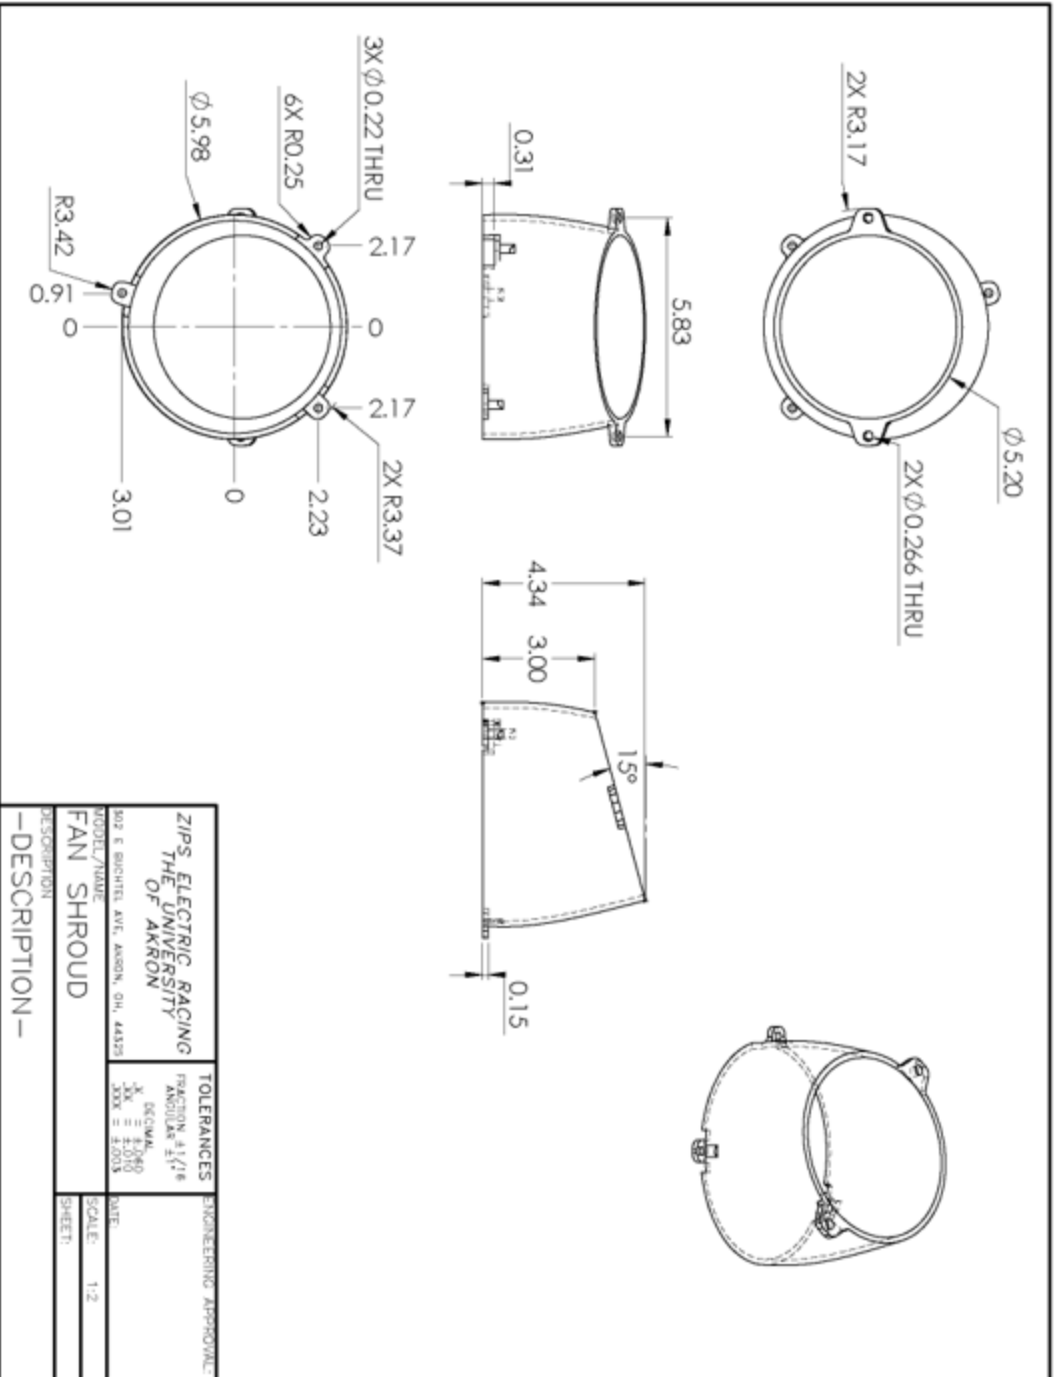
3D Printed Duct Piece that Shrouds the Fan
